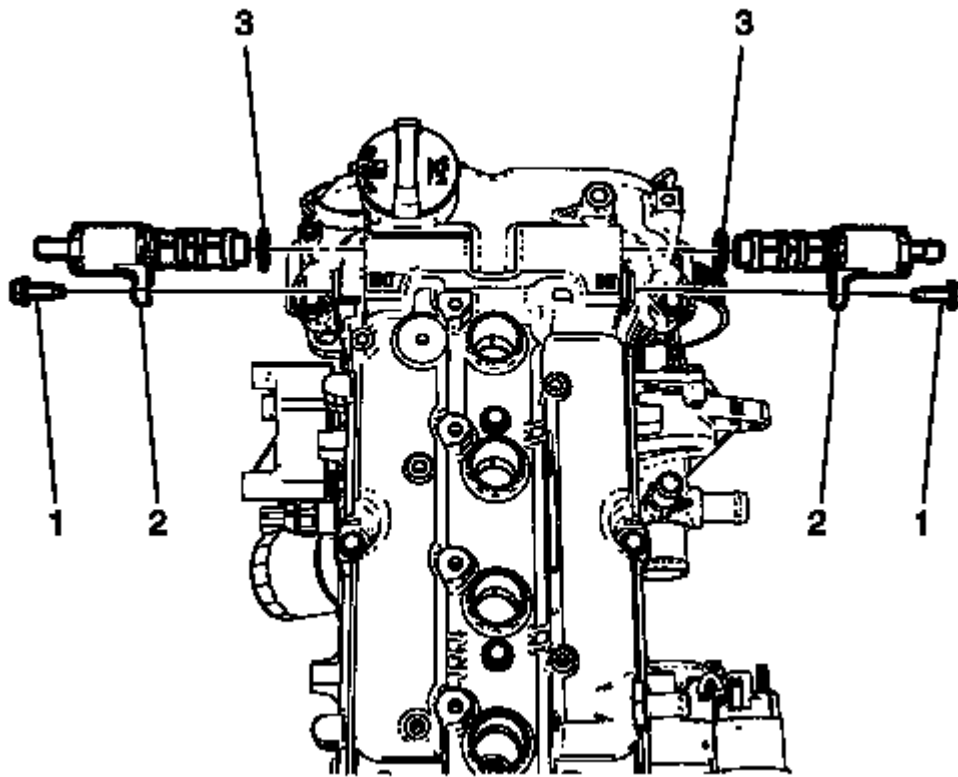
Camshaft Position Actuator Solenoid Valve Bolts And Valves
